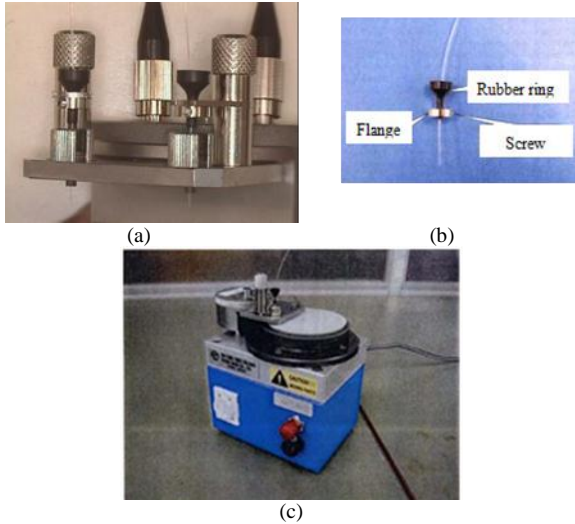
Temporary fixing Jig of fiber polishing, (a) Large view of developed Jig, (b) Fiber fixing, (c) Fixed Jig.
